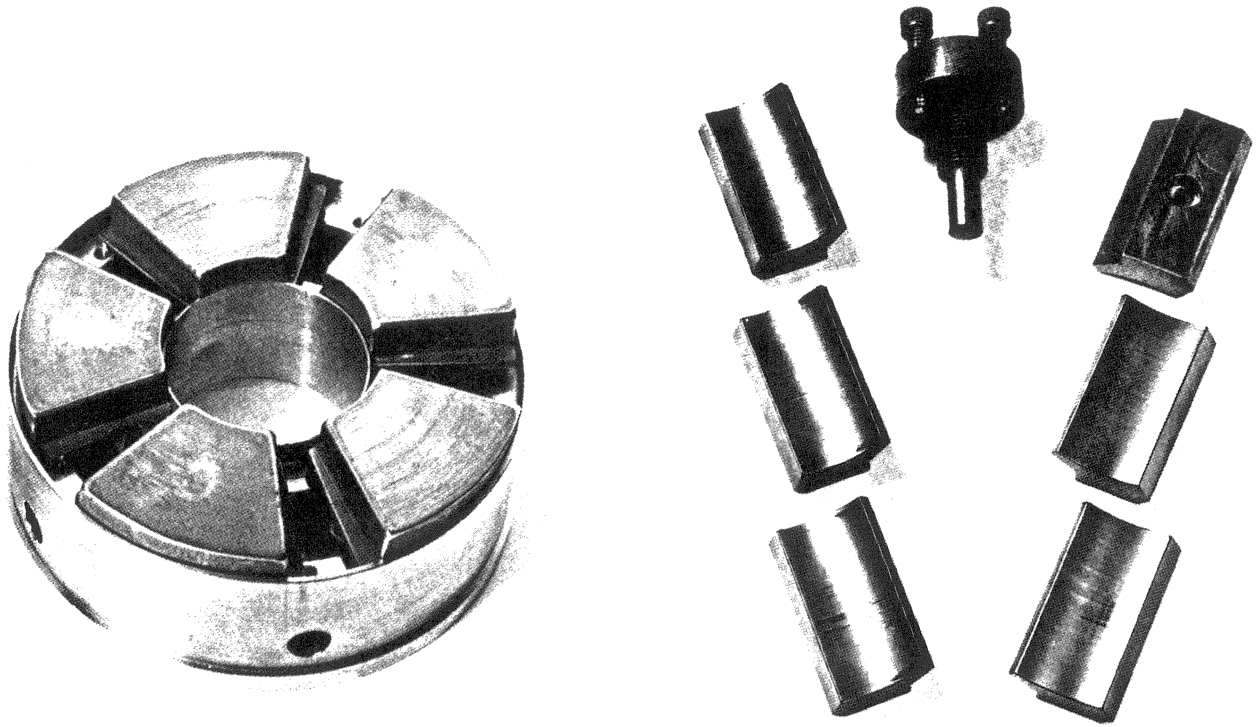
Thrust Bearing and Journal Bearing Shoes for the Prototype Helium Circulator. (designed and built by Abramovitz Associates, Inc.)
